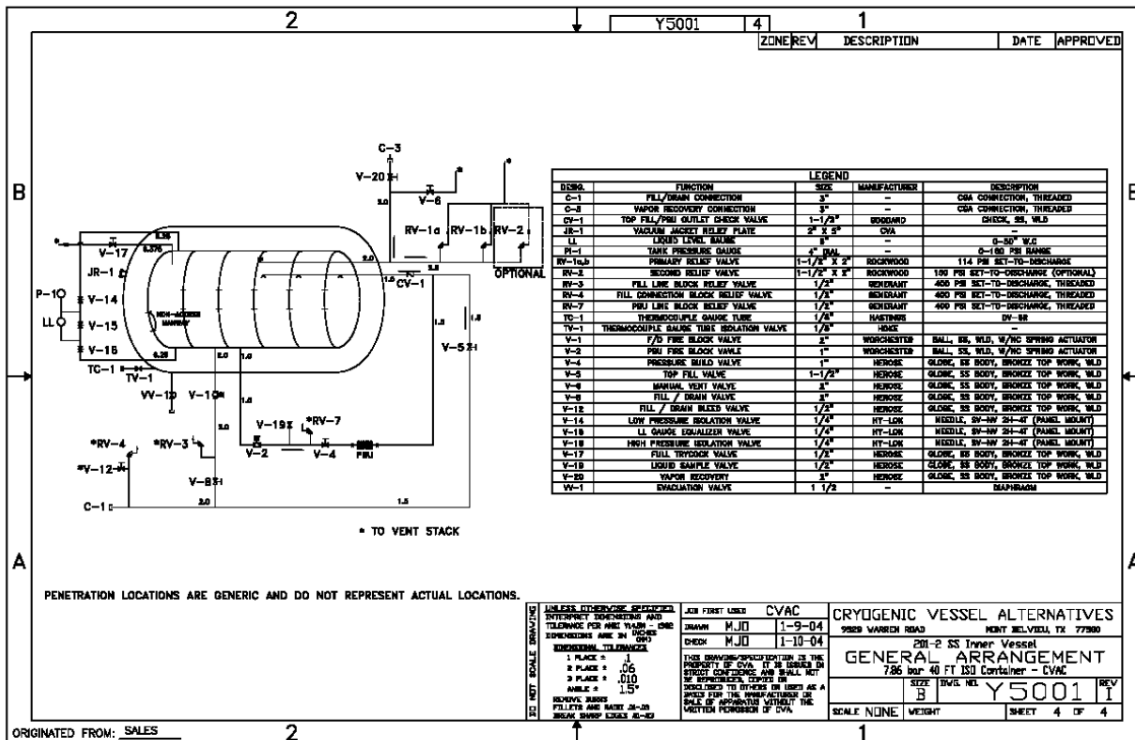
Piping Arrangement of CVA ISO Storage Tank
